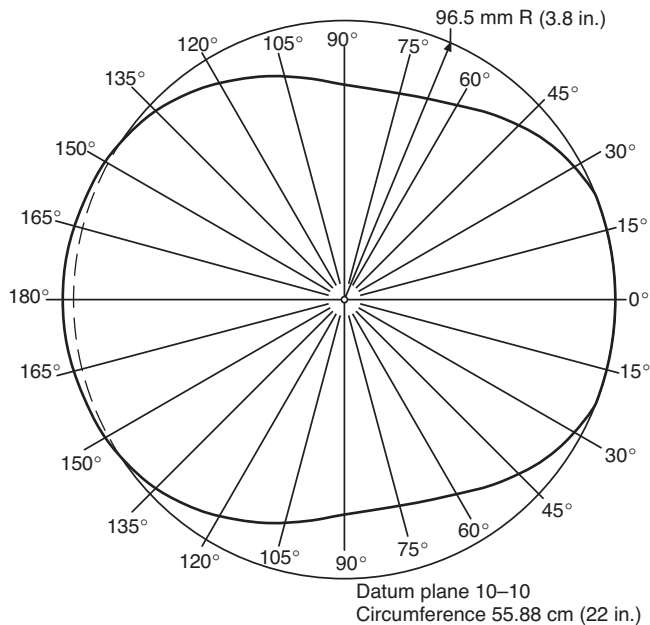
(a) ISEA Size 7 Headform, Top.
